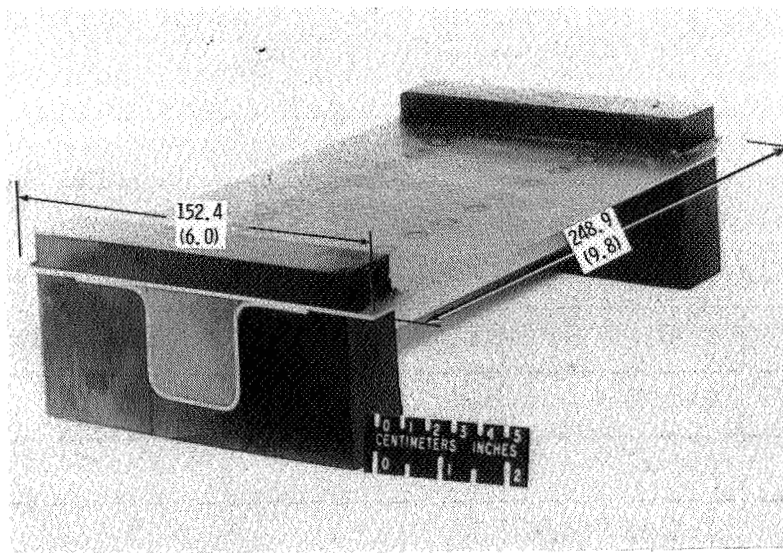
Typical panel configuration used in fabrication and joining studies. Dimensions given in millimeters (inches).
